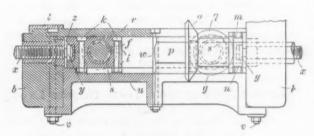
A Larger Machine with Which a Gear Reduction Mas Be Used When Cutting Large Pipe.
